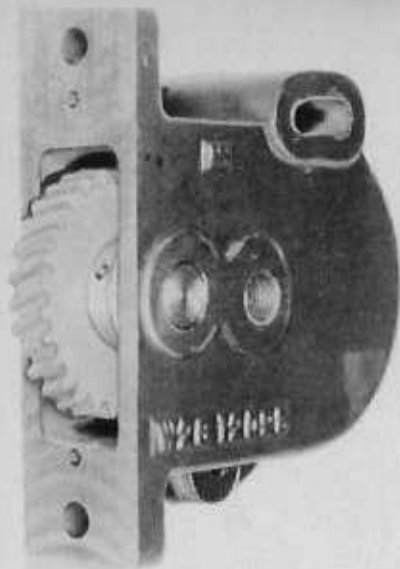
MAGNETO DRIVE GEAR CASE ASSEMBLY
